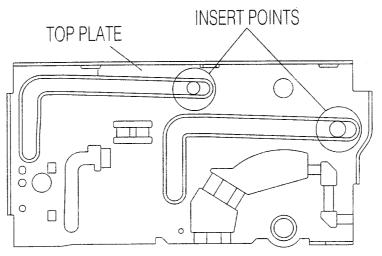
ASSEMBLY OF THE F/L ASS'Y
